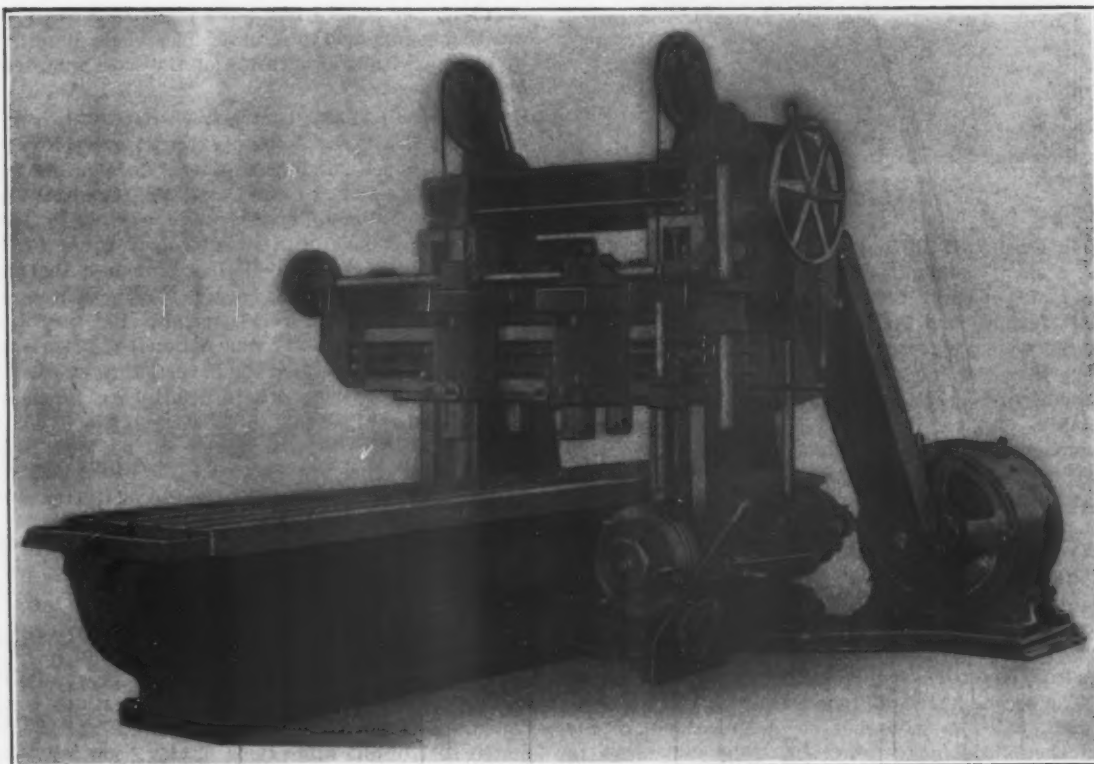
The Special Four-Head Ingersoll Milling Machine Which Performs the Finishing in the Third Operation.
